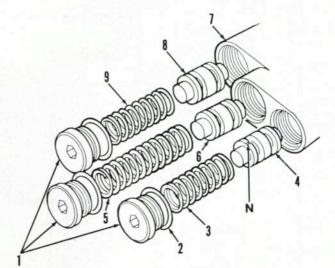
B—Low pressure regulating valve used on TW-35 tractor.
